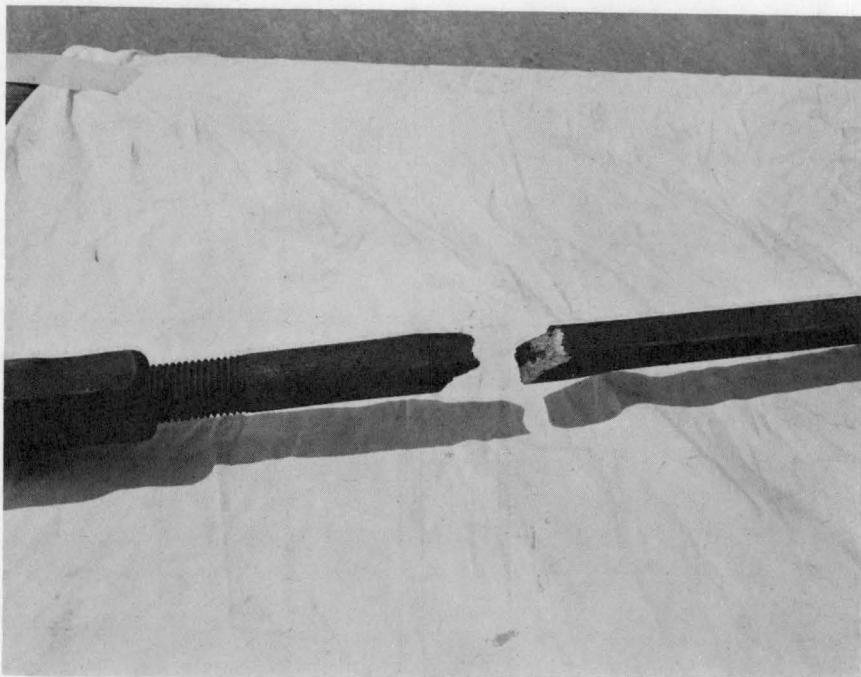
Photograph showing fatigue fracture in forging near a turnbuckle.
